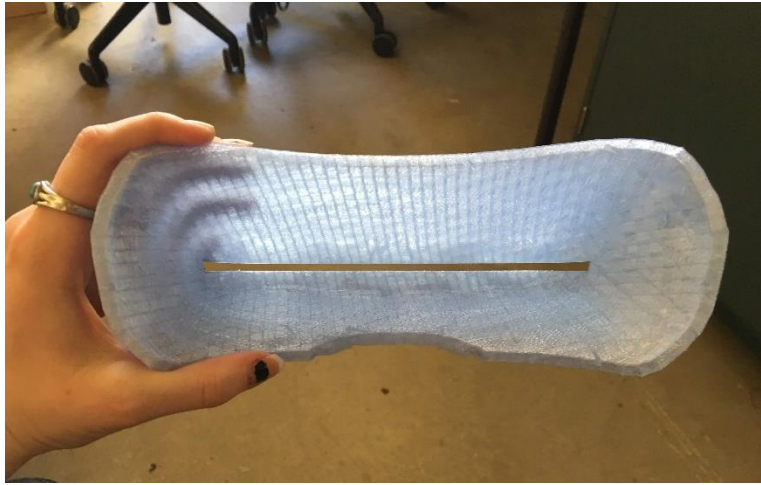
and Figure 14: First test print after printing. This print was done in clear/blue PLA and had some flaws that were remedied in the second print. Both images courtesy of author.
